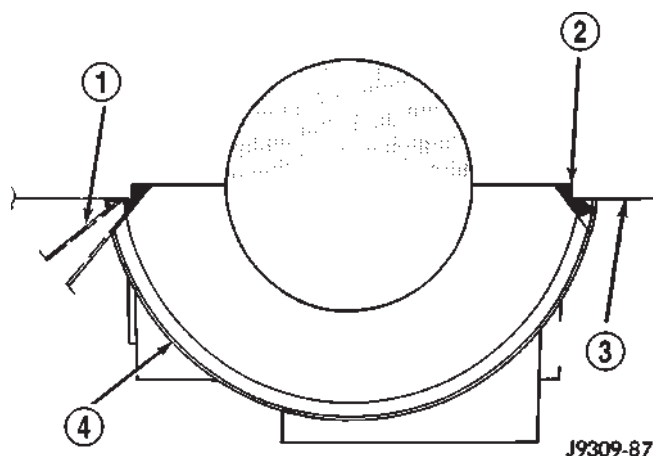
Apply Sealant to Bearing Cap-to-Block Joint
